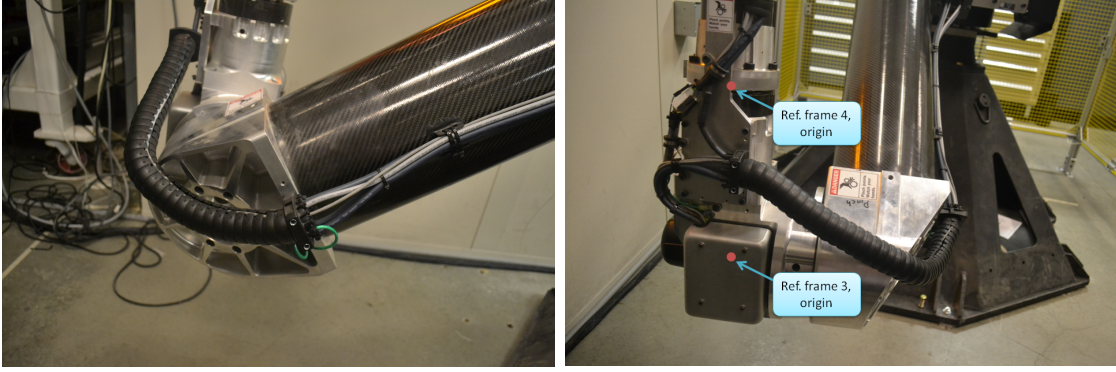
Elbow joints: two views of the elbow-pitch and elbow-roll joints.
